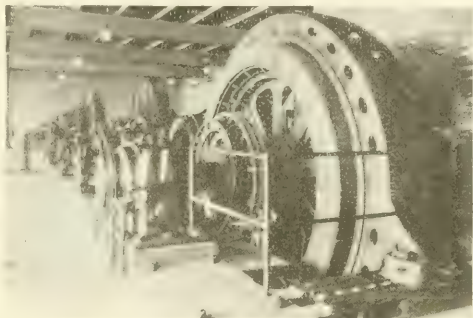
2500 H.P. ALTERNATING CURRENT MOTOR DRIVING 3-HIGH FINISHING STAND OF 84-INCH MILL
